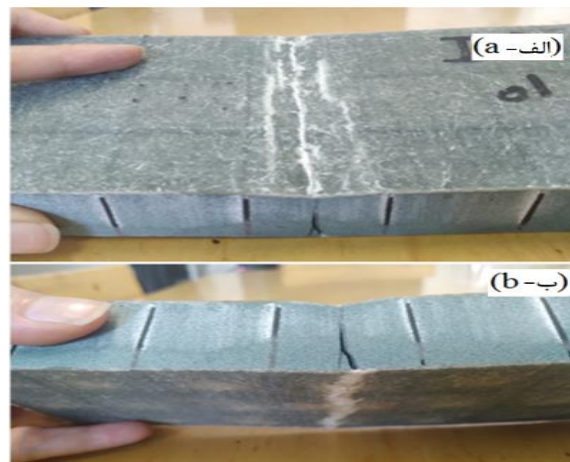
Failure appeared in (a) upper face-sheet and (b) lower face-sheet in the sample with resin lattice under three-point bending test
